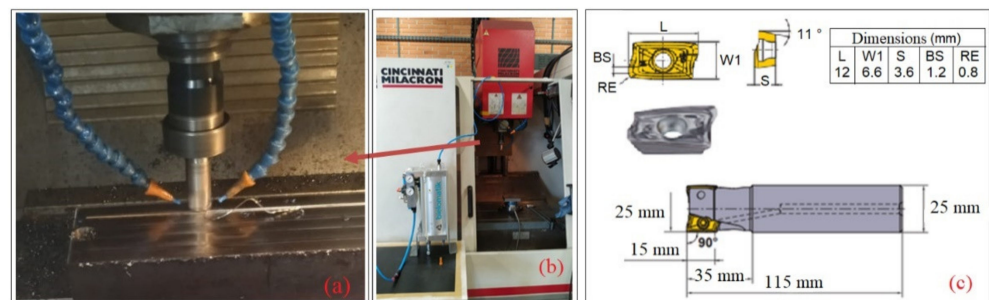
(a) Milling process to analyze the tool's machining time. (b) Cincinnati Milacron Arrow 500 machining center used for end milling. (c) Geometric specification of the interchangeable cutting tool and clamping shank.
